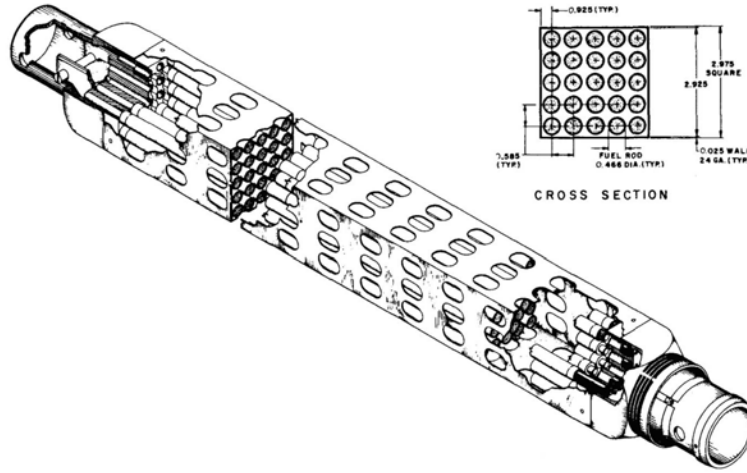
Spert III Type-E 25-rod Fuel Assembly (Ref. A-45)
